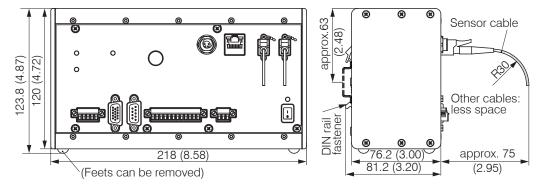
Dimension drawing of controller IFC2471, dimensions in mm, not to scale
